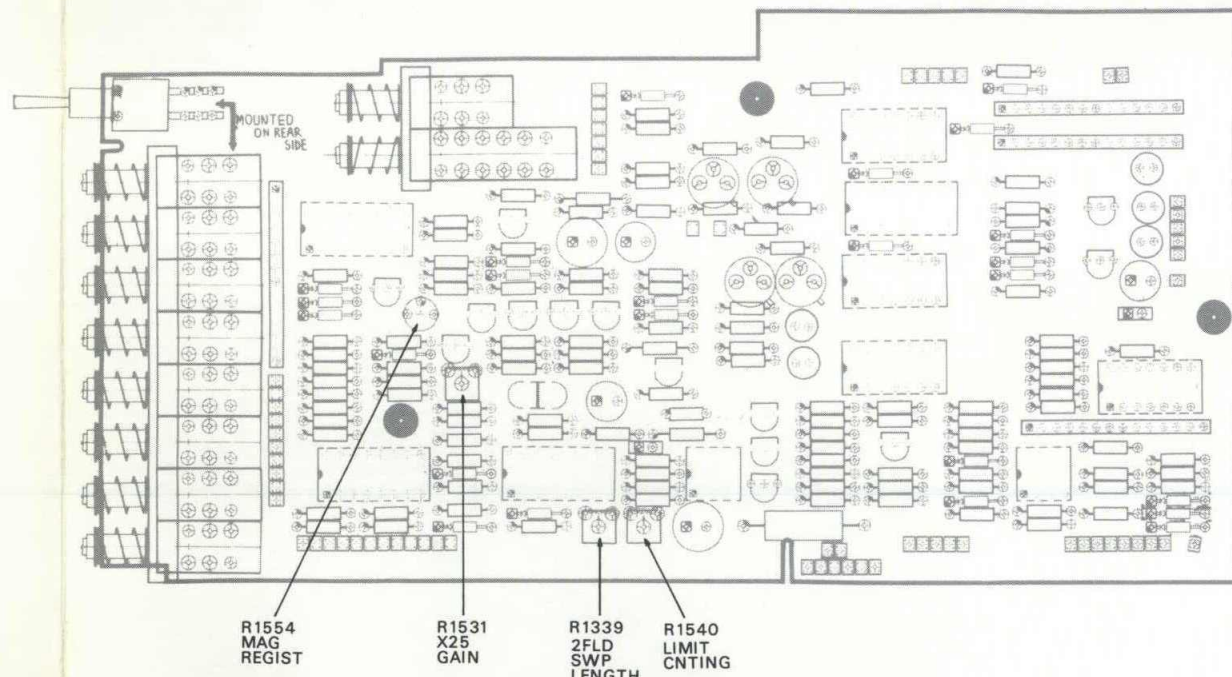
A3 SWEEP BOARD ADJUSTMENT LOCATIONS
